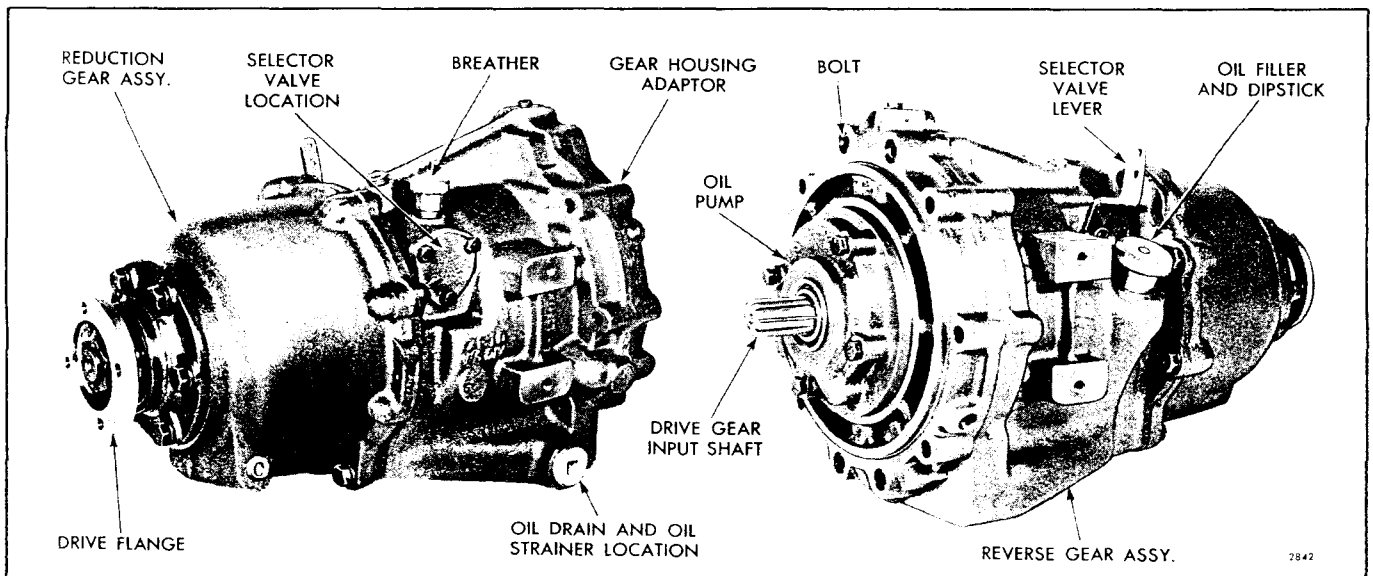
Three Quarter View of Former Reverse and Reduction Gear Assembly
